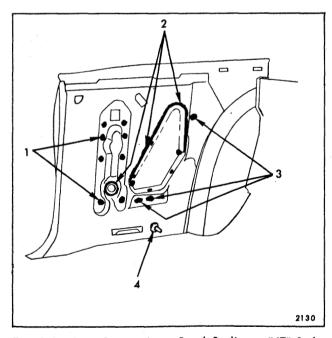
Rear Quarter Inner Panel Sealing - "67" Styles
